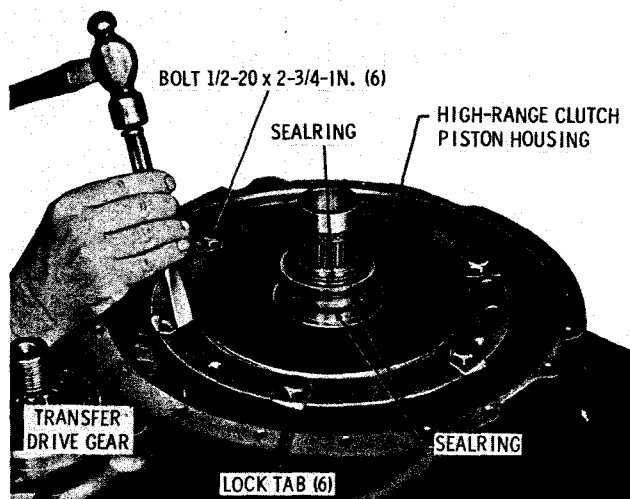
Flattening piston housing bolt tabs (TTB 2221-1, 2421-1)
